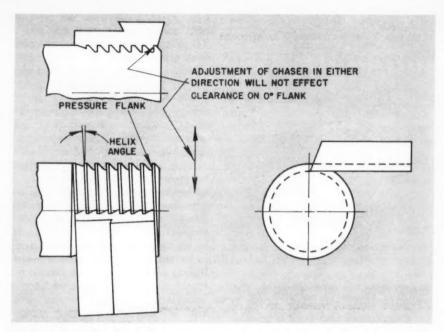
Because little clearance between chaser and work is possible, finish is a problem.
